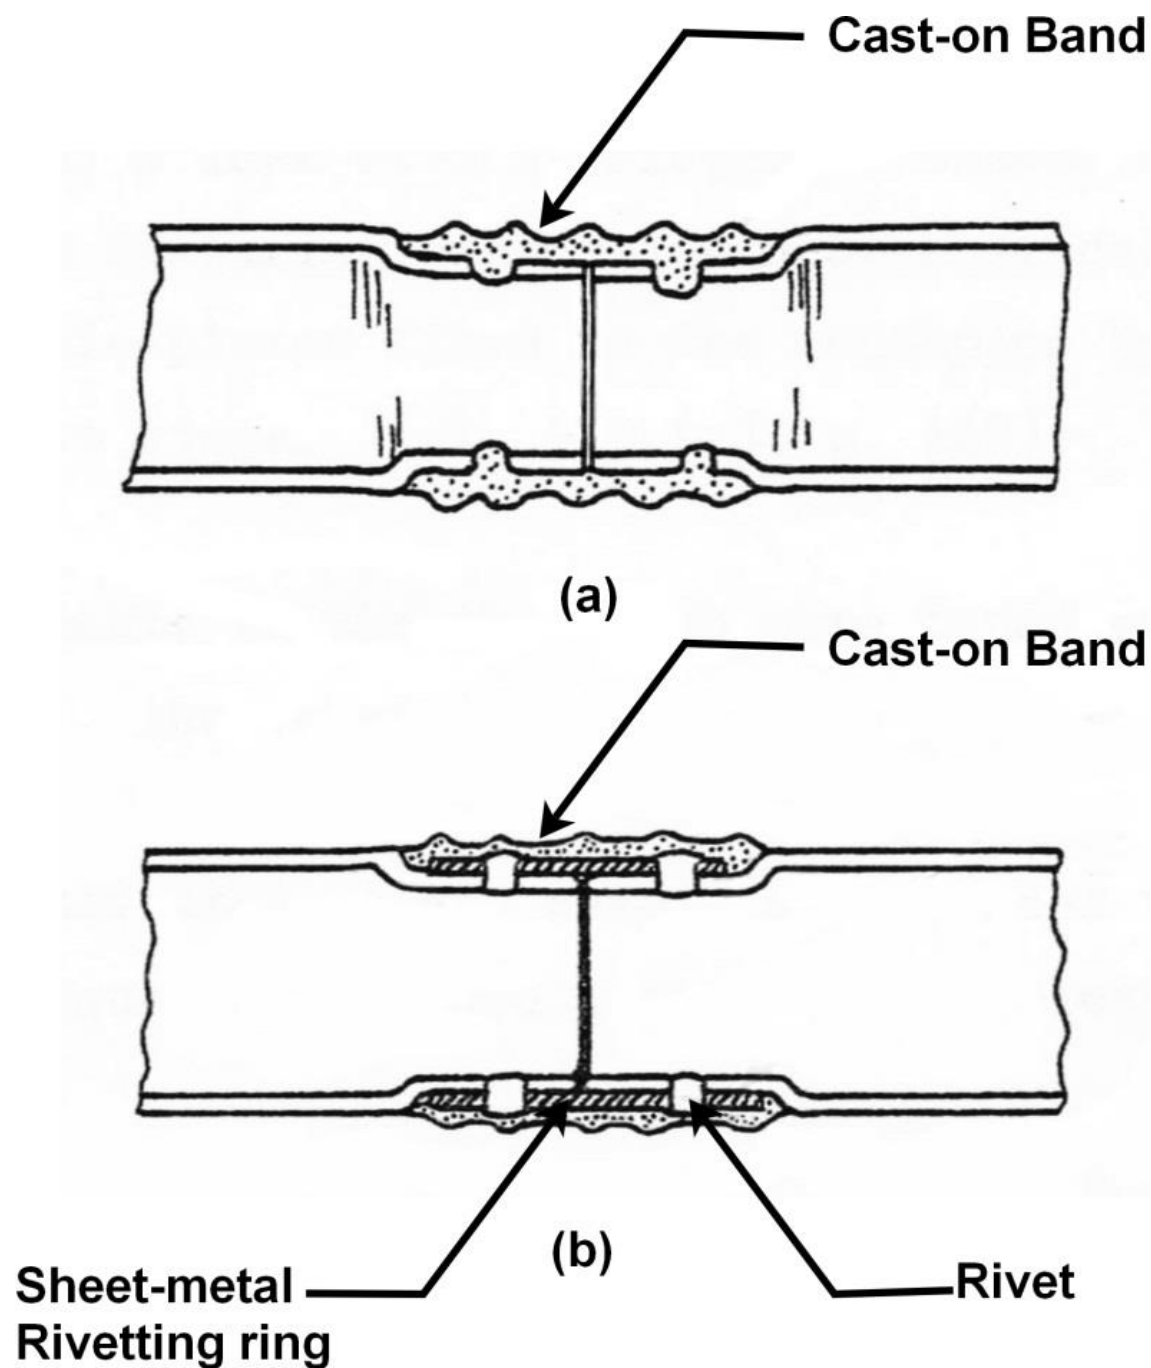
A Joining Structure on the Rossum Lur Fragment
